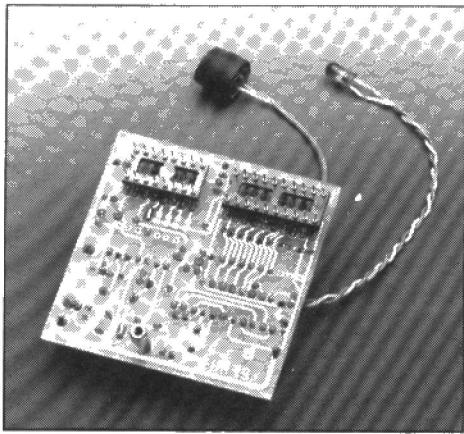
Showing how the DIP headers are fitted at the solder side of the DTMF board.
